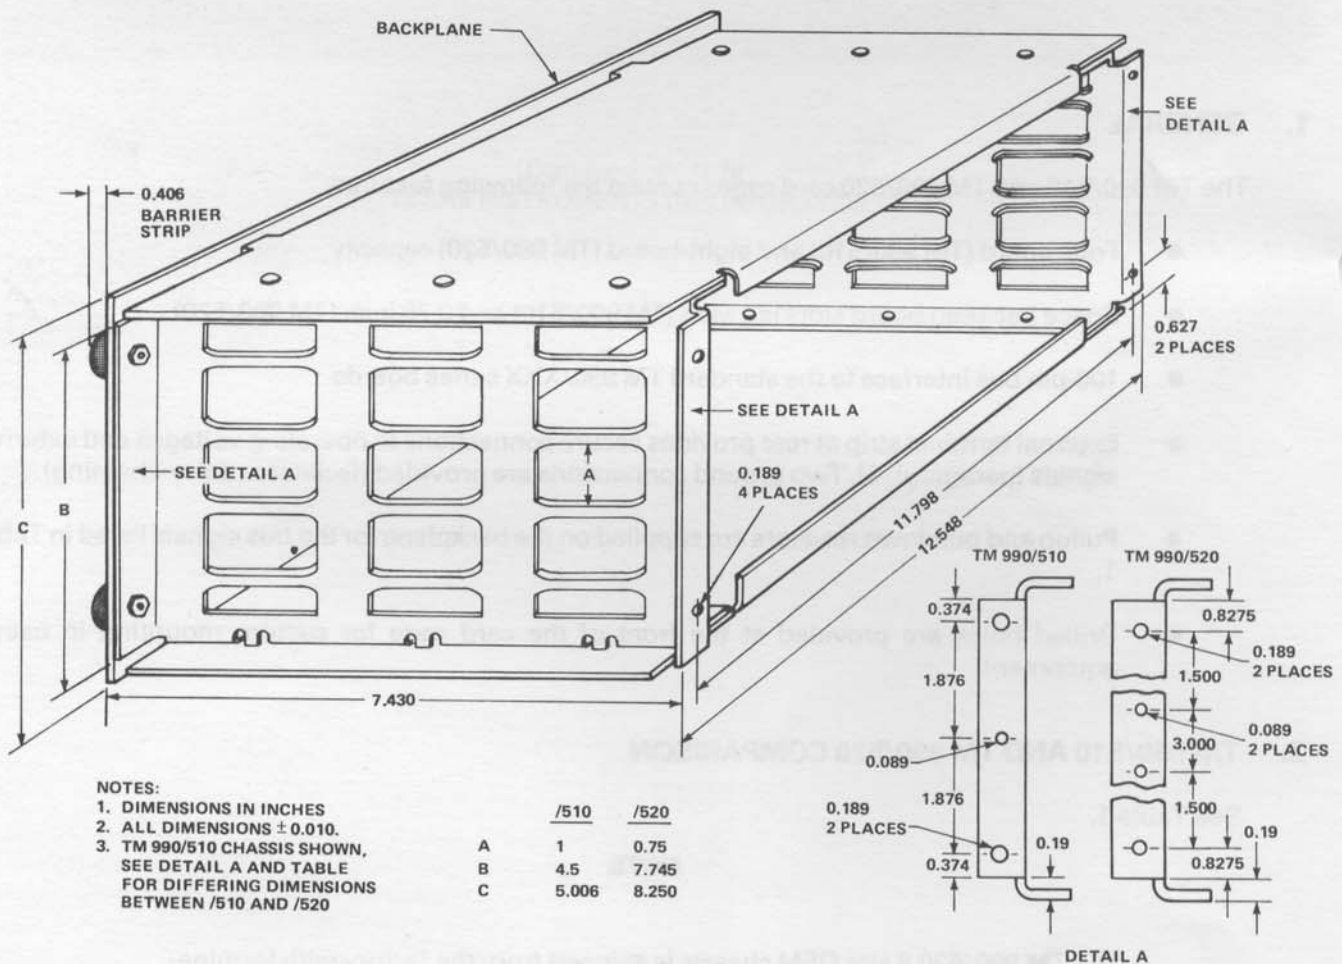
CARD CAGE DIMENSIONS FOR BOTH MODELS
